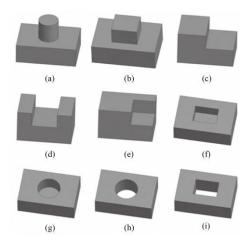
Examples of machining features for CAD integration of mechanical numerical control board parts [13].
